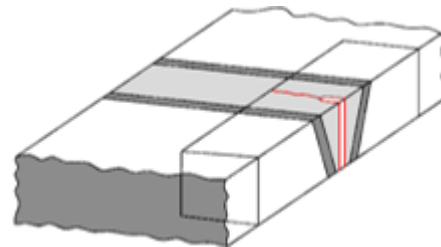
Specimen orientation with respect to the weld axis for fatigue crack growth test.
